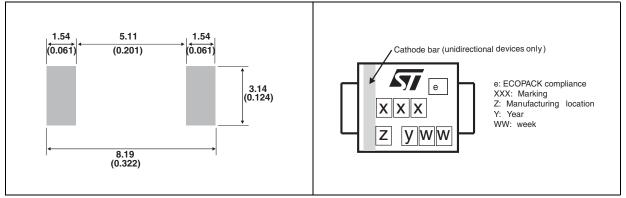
SMC footprint dimensions in mm Figure 14. Marking layout⁽¹⁾ (inches)
